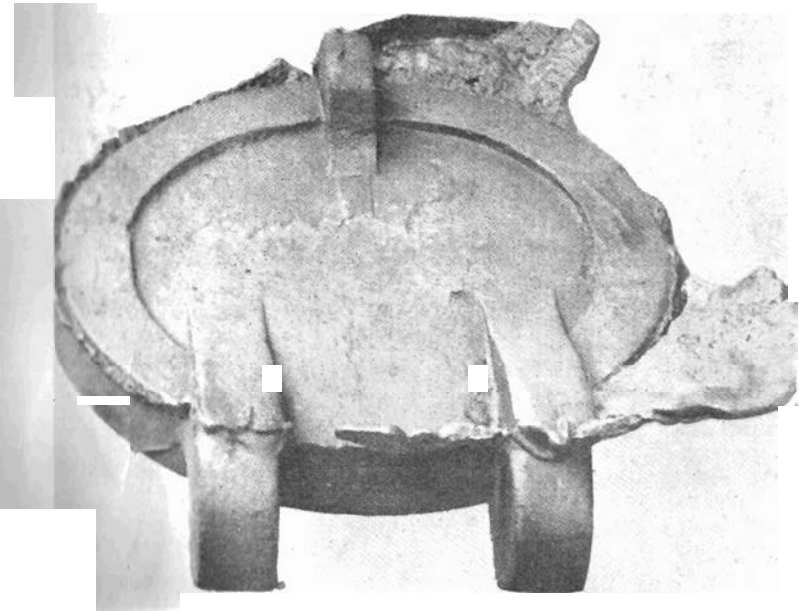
Excessive flash or fin along the parting line of a grey-iron casting.
